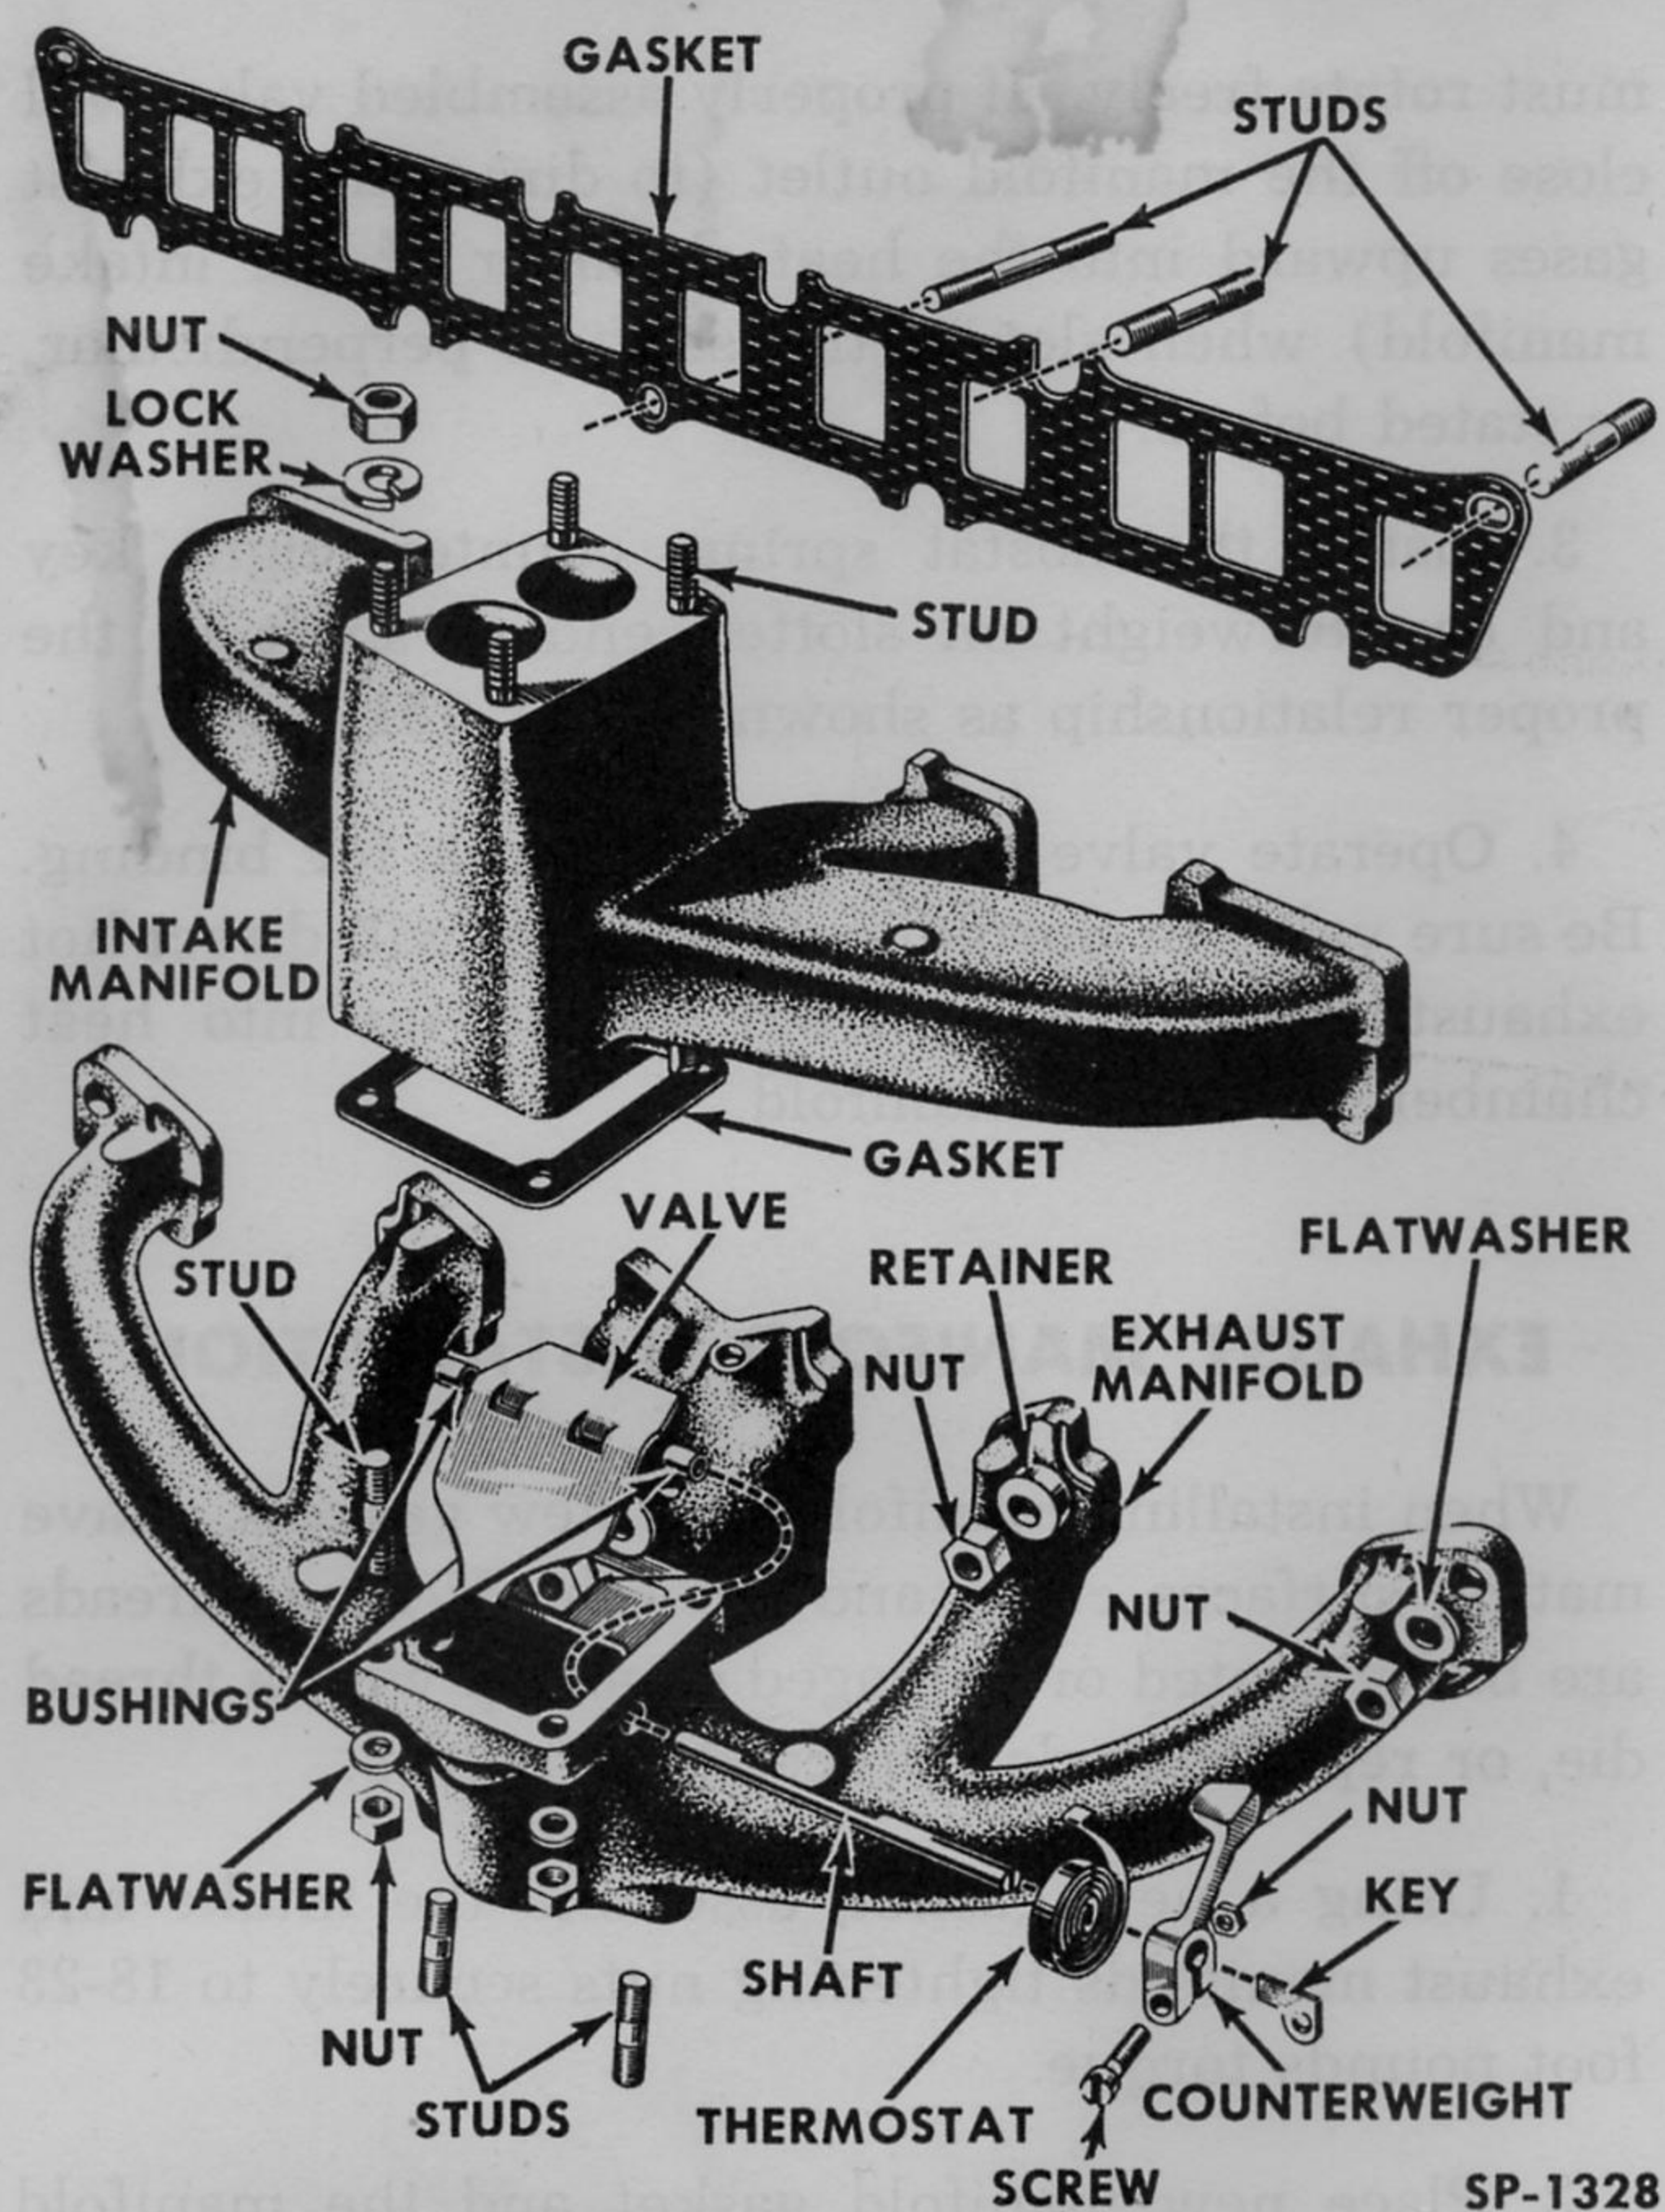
Exhaust and Intake Manifolds—Exploded View
